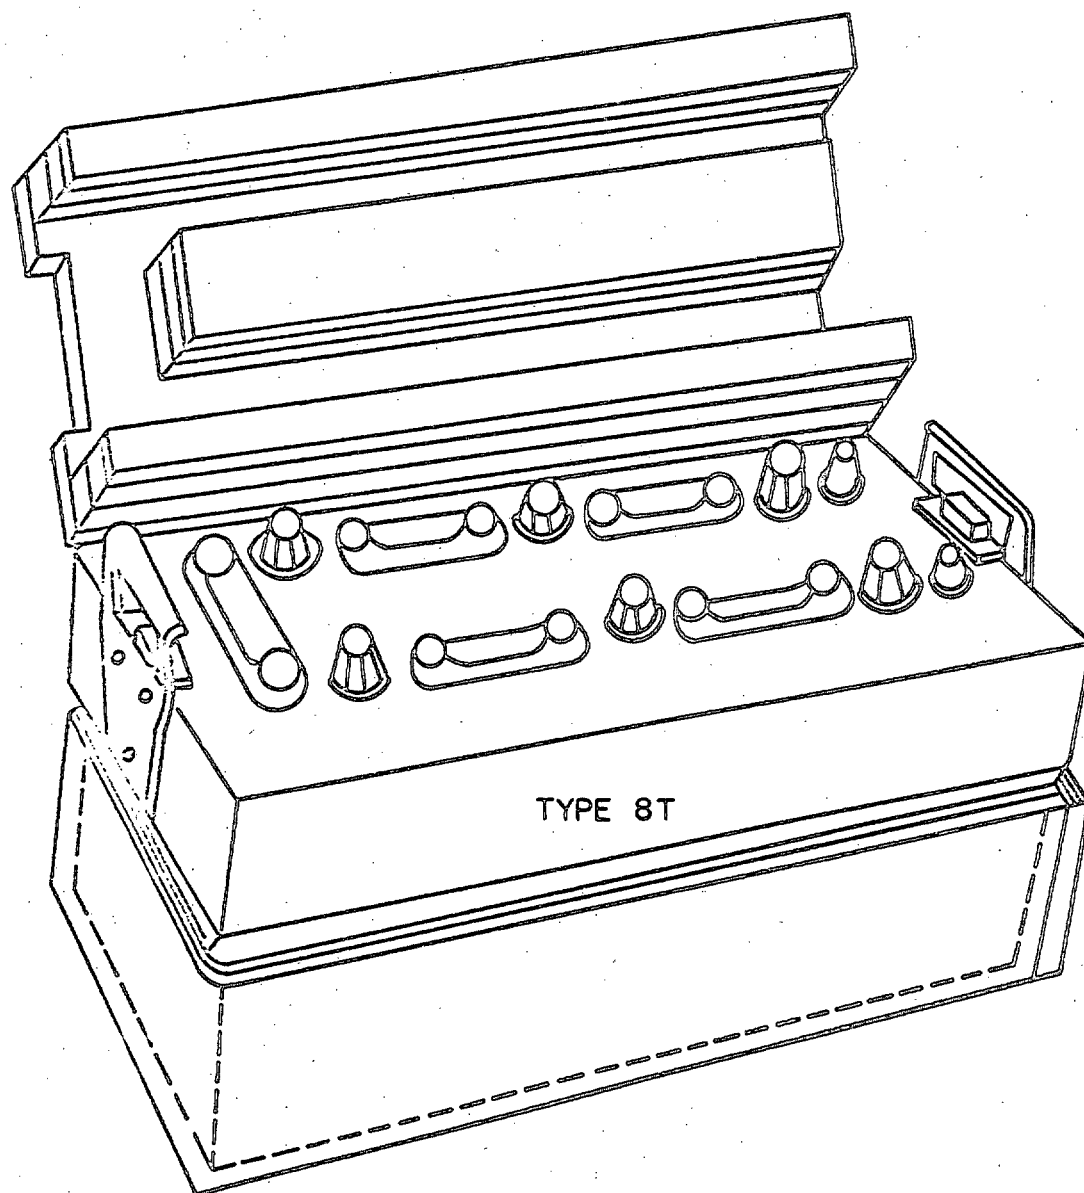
TOP FRAME AND SLEEVE ASSEMBLY
